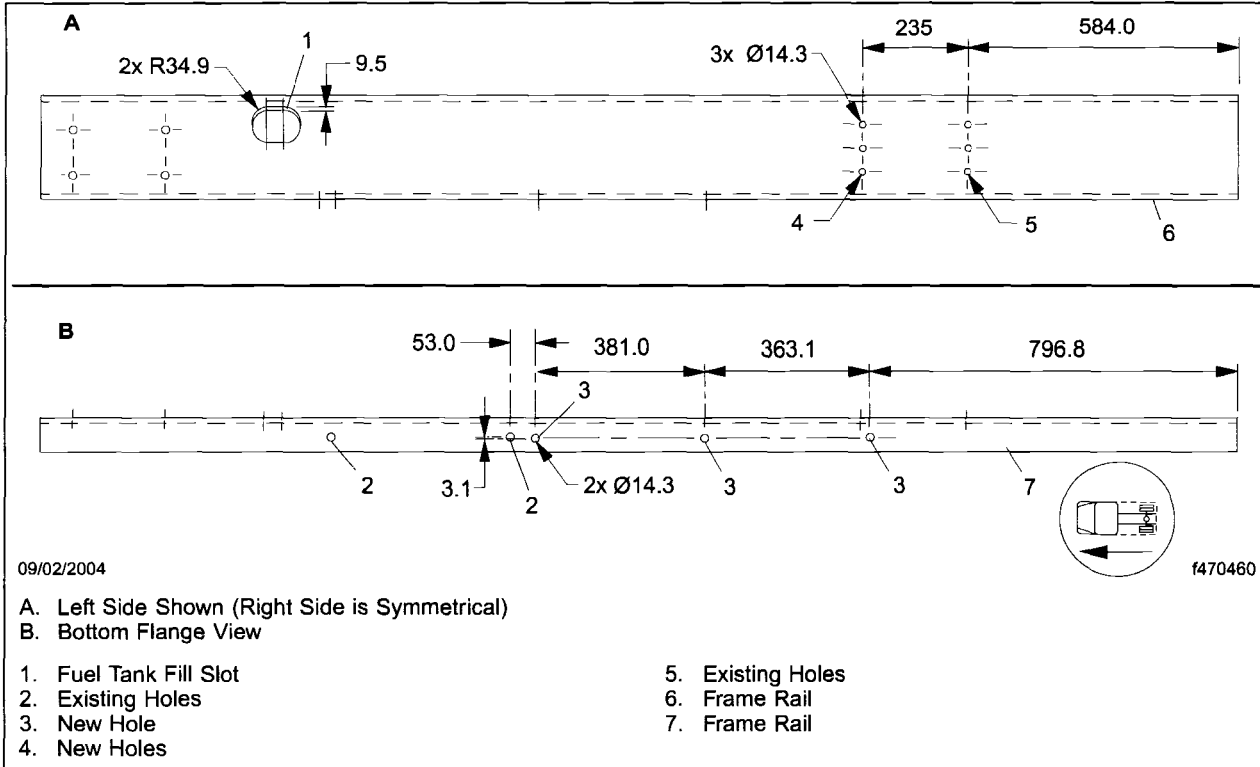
, New Hole Locations for Fuel Tank Mounting (measurements are in millimeters [mm])
